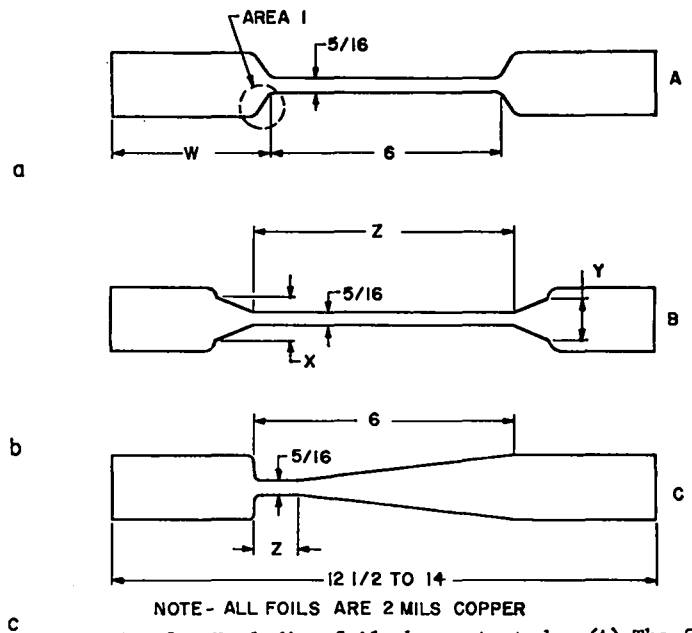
Exploding foil shapes tested. (A) The feed tab length was varied for the standard six-inch exploding foil. (B) Tapered foils were tested to see if a blowout problem could be solved. (C) A very short exploding foil closed a switch length which depended on energy input.
